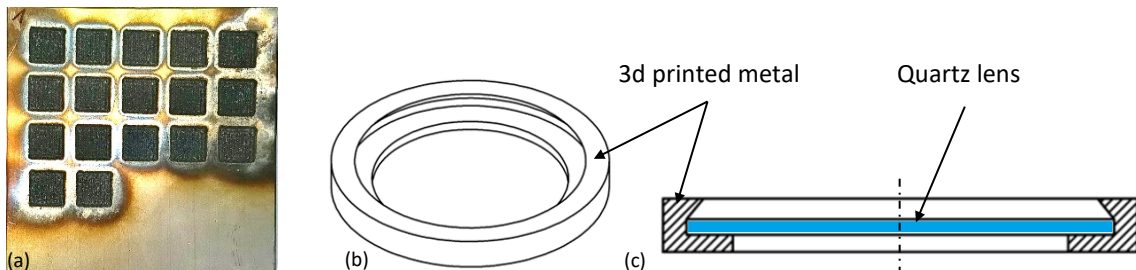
Sketch (a), section (b) of the 3D printed encapsulation and (c) DOE specimen
